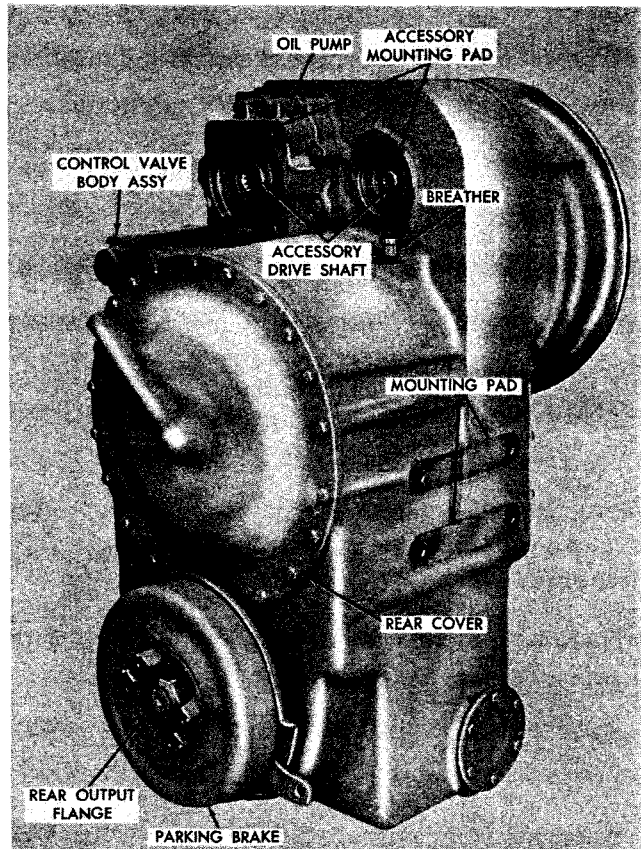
Model TT 2220-1 transmission, direct mount—right-rear view
